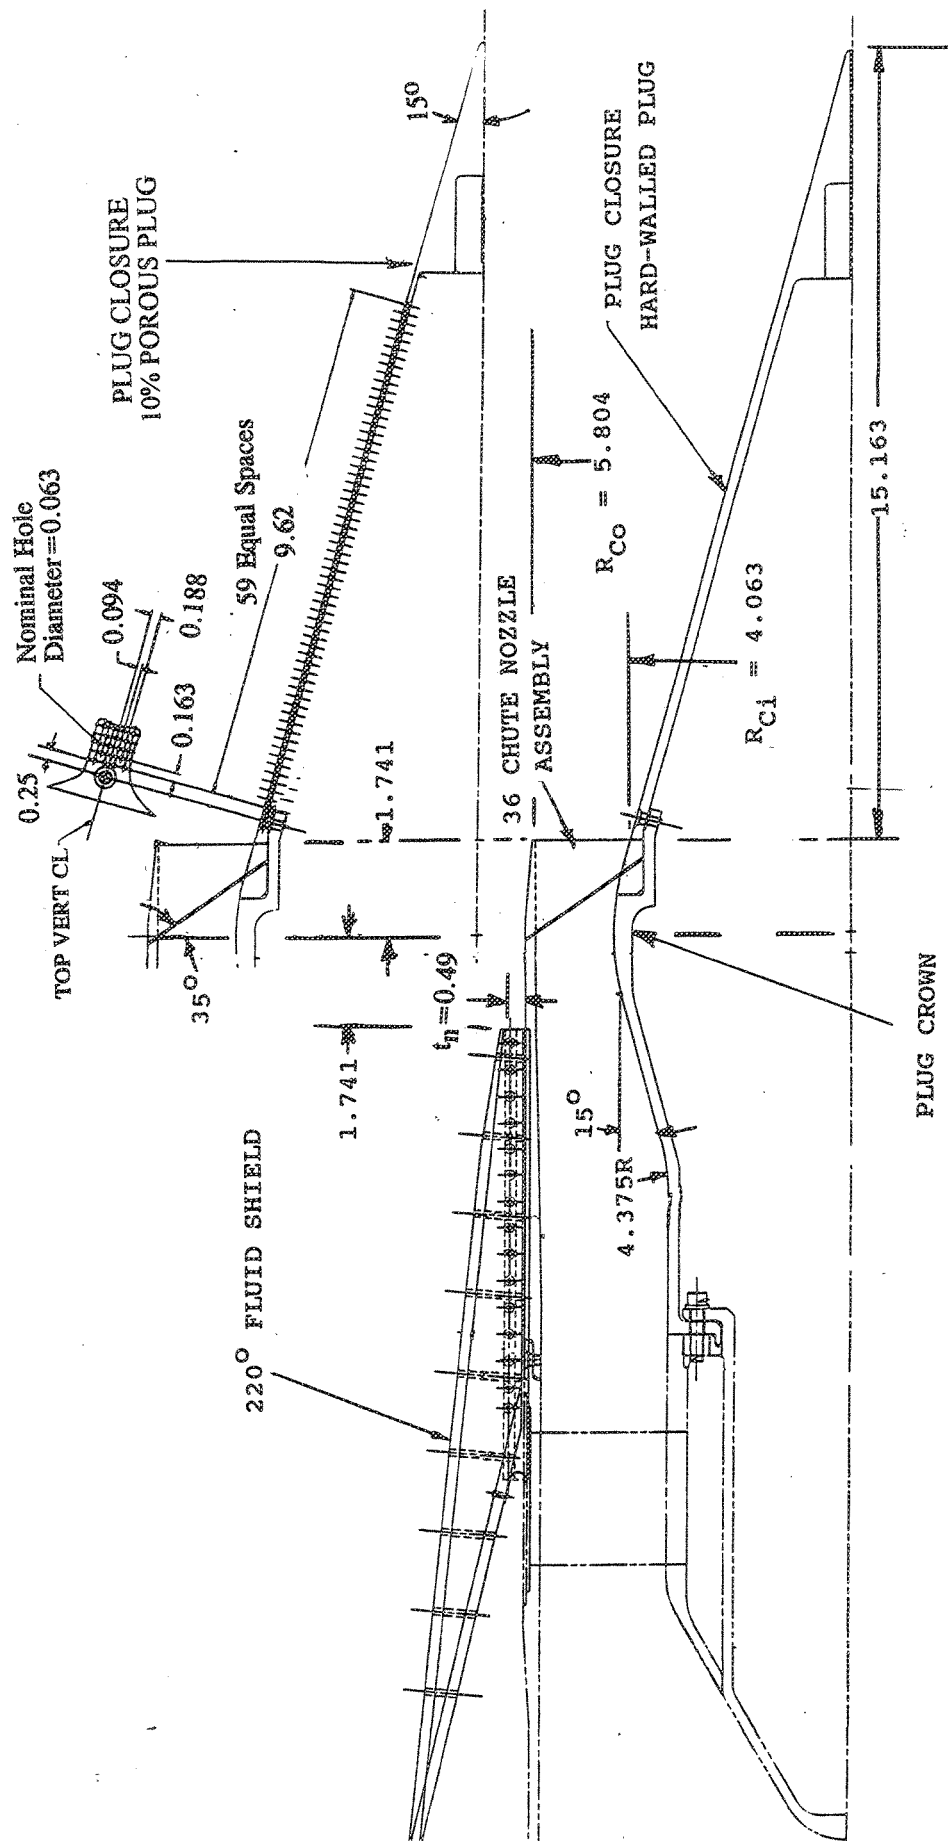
Layout of the fluid shield nozzle with 220° wrap for acoustic tests (All dimensions are in inches).
